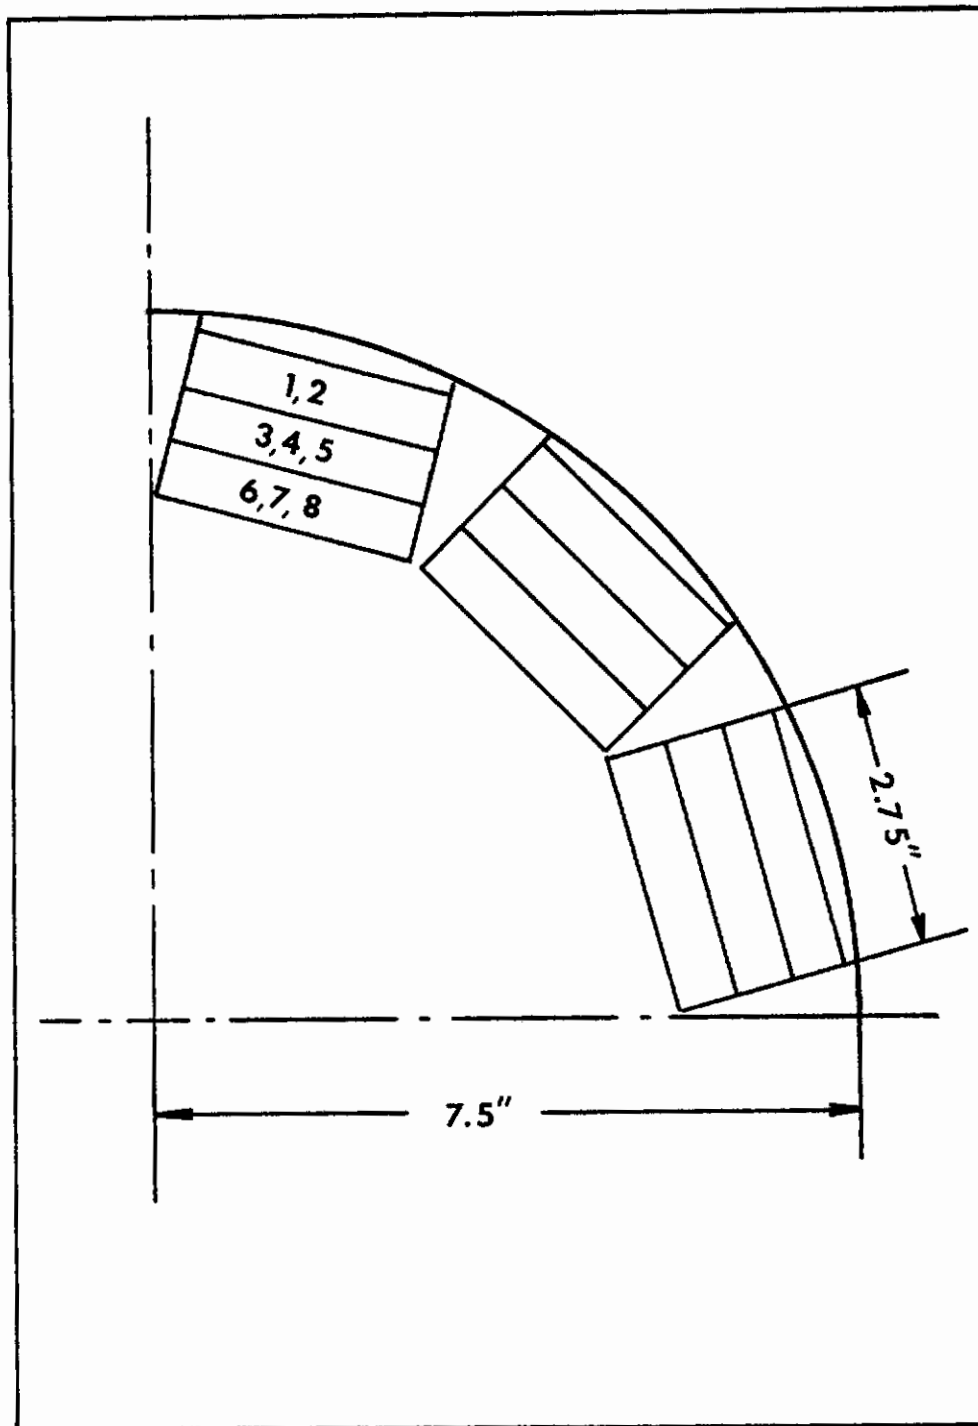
DIVISION OF THE RENÉ 95 PANCAKE INTO TWELVE SECTIONS WITH EIGHT SPECIMEN BLANKS IN EACH SECTION (ONE QUARTER OF PANCAKE SHOWN)
